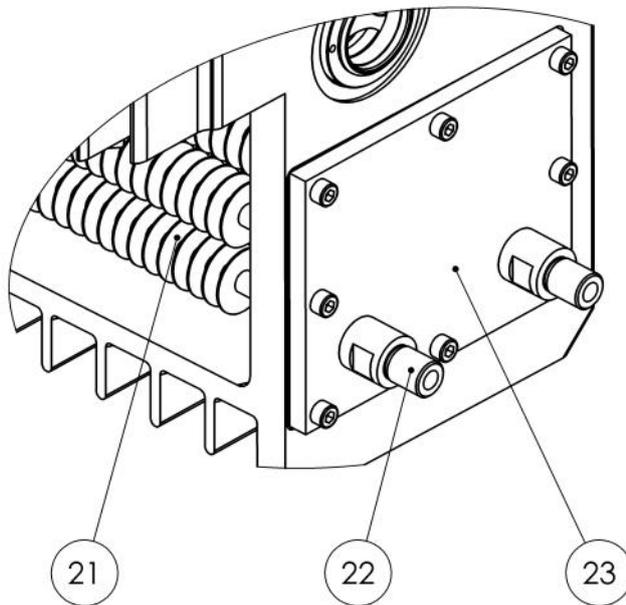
Water Cooler Detail (For ZFW... Bearing)
